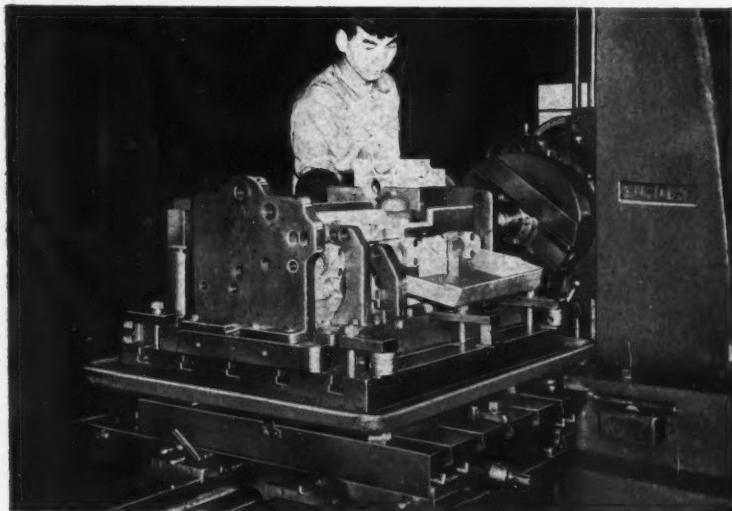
On this Hirose horizontal borer, a jig is employed to hold the bed casting for a single-spindle automatic, and to guide the various bars for the main spindle, cam-, and drive-shaft bores
